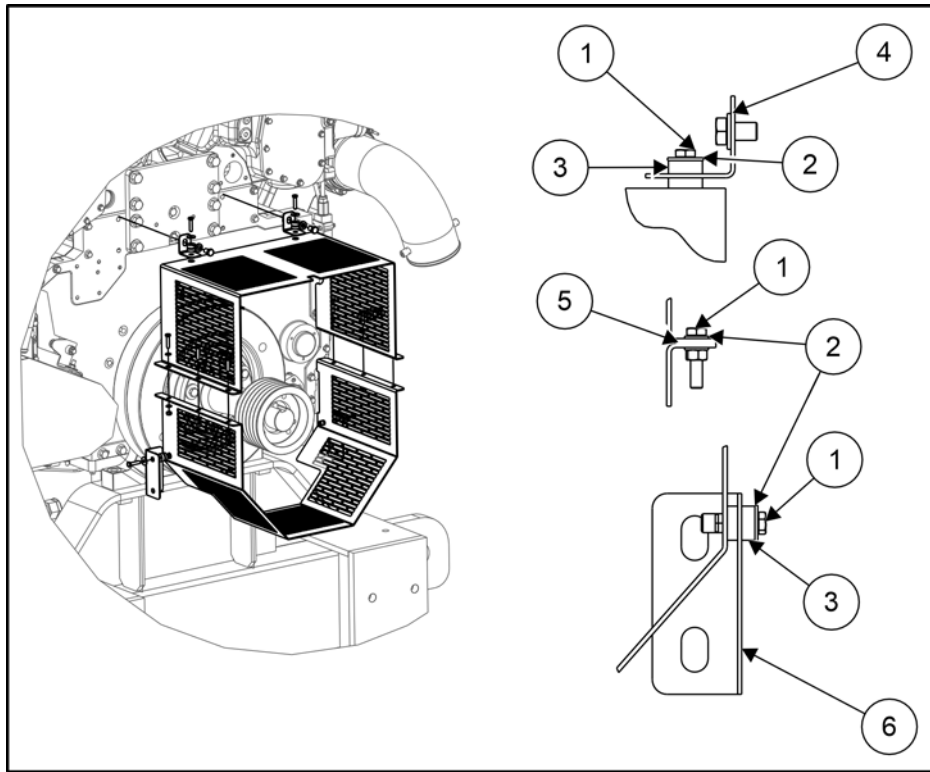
ENGINE DAMPER GUARD COMPONENTS
